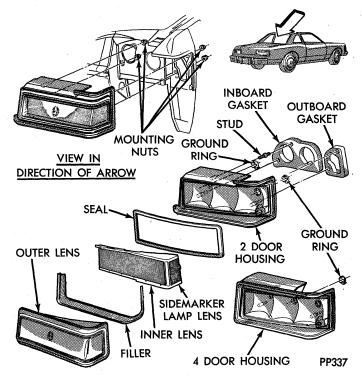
Tail, Stop, Turn Signal, and Side Marker Lamp—Carline F
